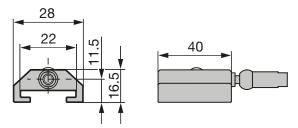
Installation dimensions of BTL5-T-2814-1S magnet
